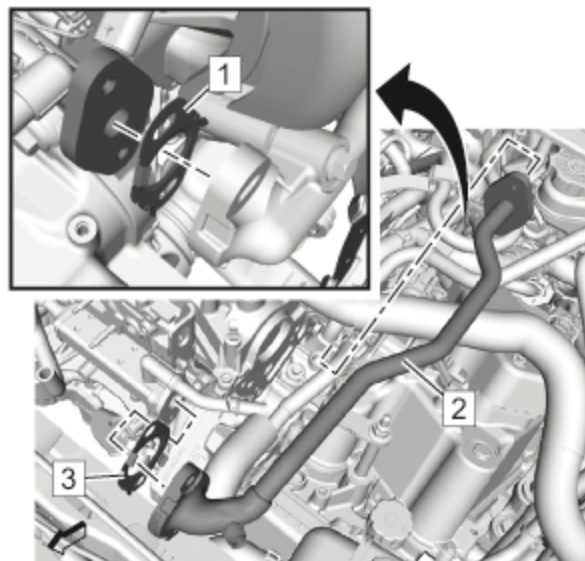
Exhaust Gas Recirculation Cooler Outlet Pipe And Seals
